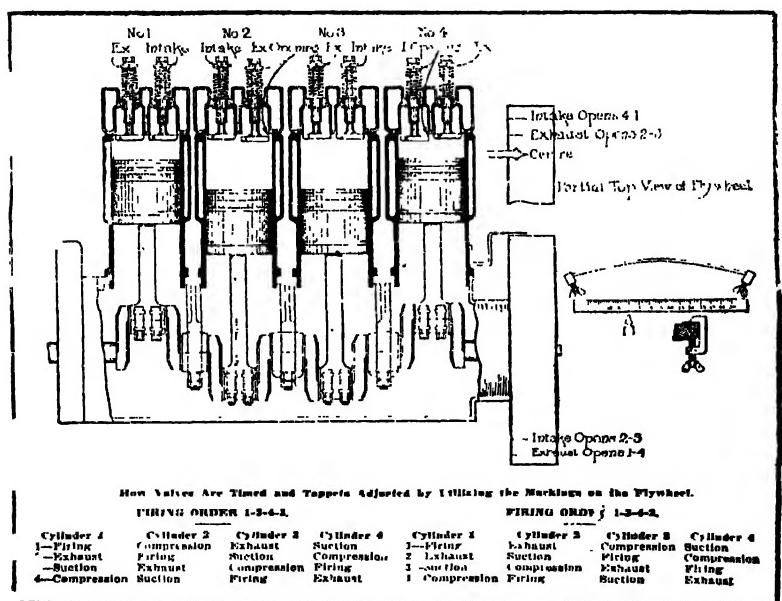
Explaining Method of Timing Valves and Marking Flywheel of Four Cylinder Motor.
